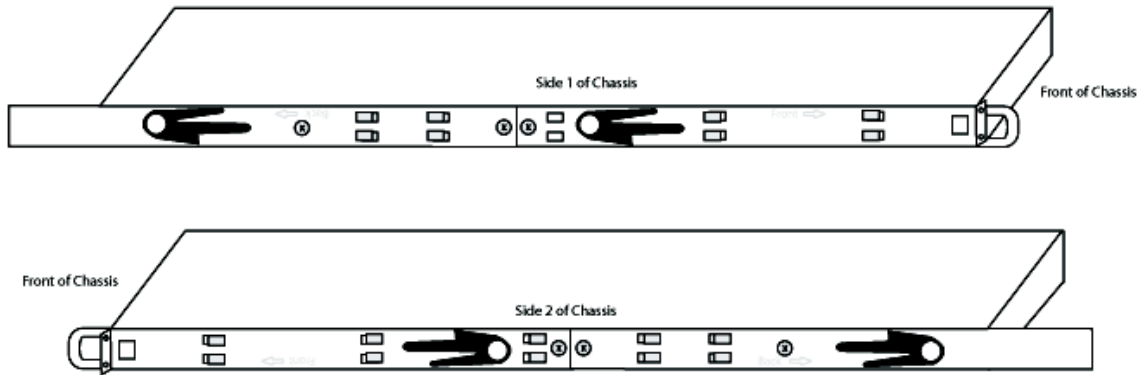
Chassis Sides with Front and Back Slides Installed, Side Views
